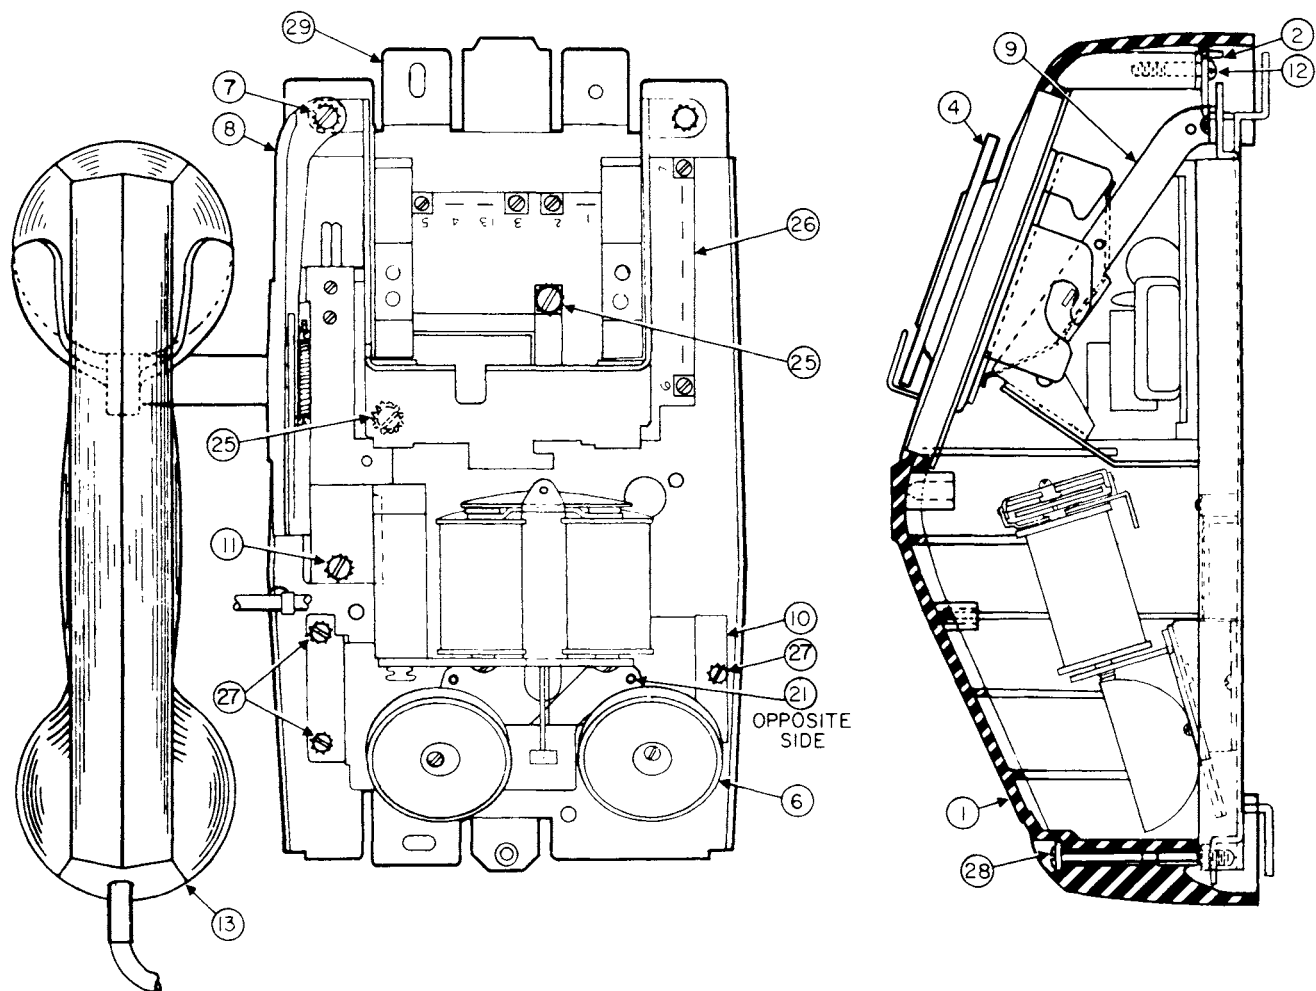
Type 90M Telephone Set, Front View with Cover Removed and Side View.
